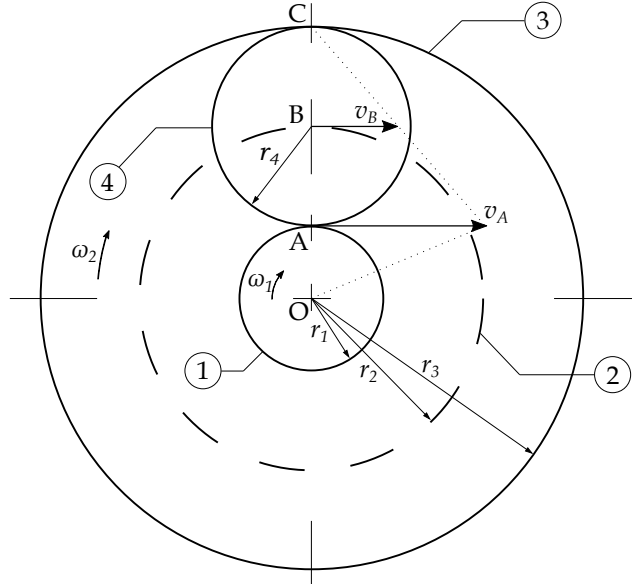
Kinematic diagram of a fixed ring epicyclic gear drive.
